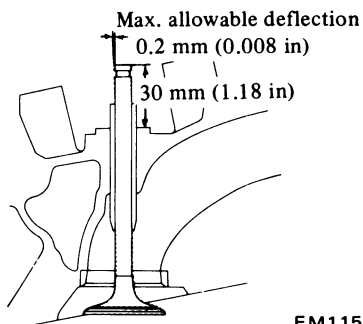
Measuring Clearance between Valve Stem and Valve Guide
